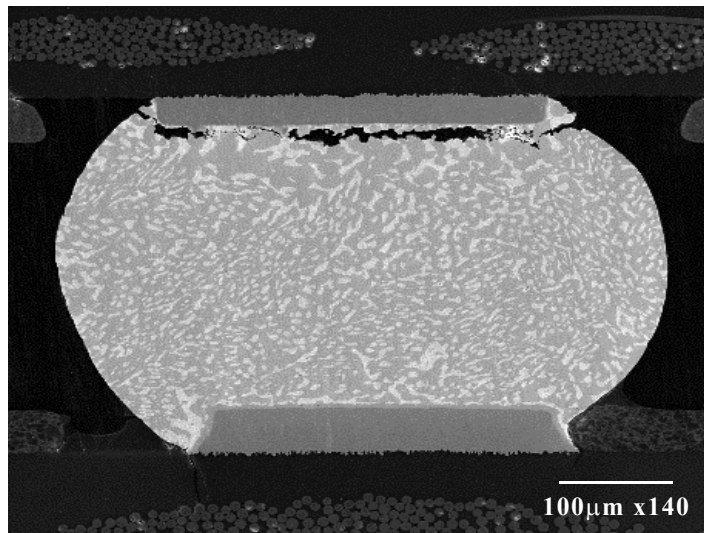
Typical Solder Joint Fatigue Failure, 17 mm BGA, Vendor V1
